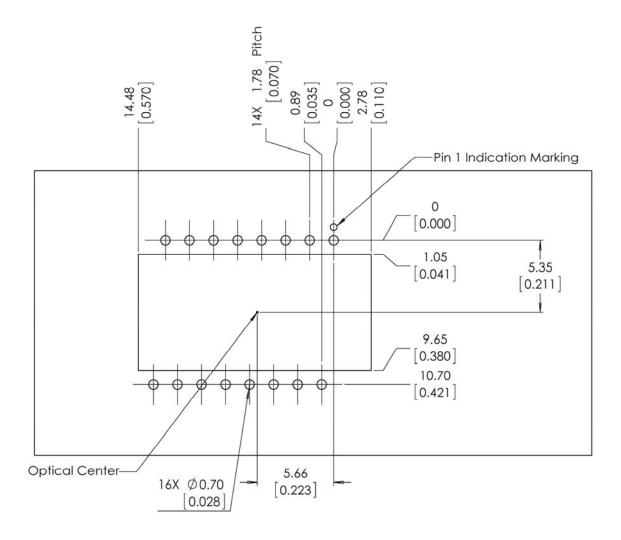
Recommended sensor orientation, mechanical cutouts and spacing (Top View)
